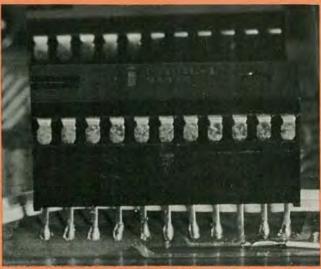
SINCE THE HOLES ARE NOT PLATED THROUGH, wire-wrap sockets should be raised about 3/16 inch off the board so that the pins can be soldered on both sides.
